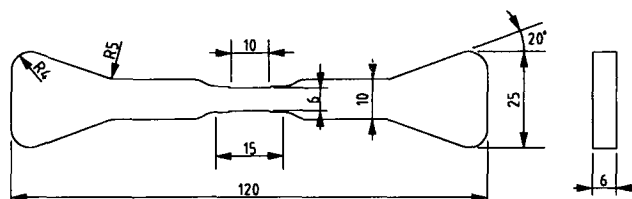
Geometry of tensile specimen (dimensions in mm)
